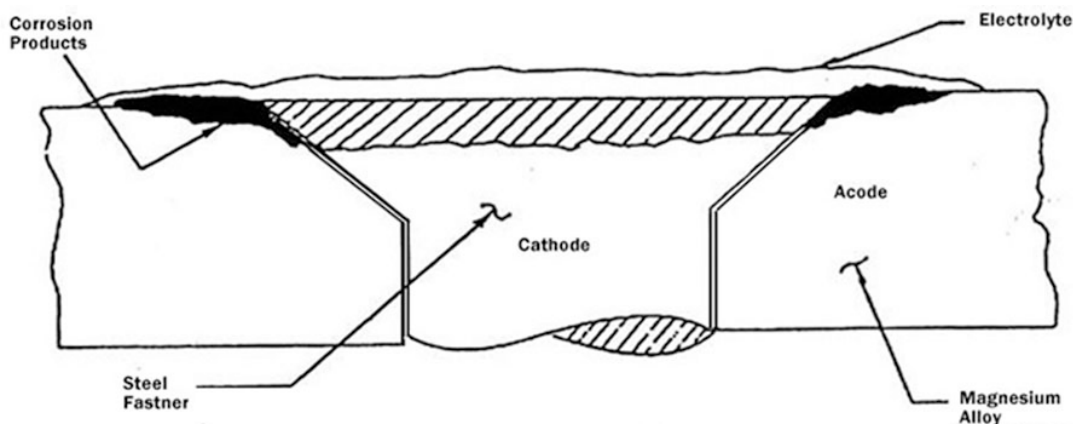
Galvanic corrosion of magnesium adjacent to a steel fastener.
